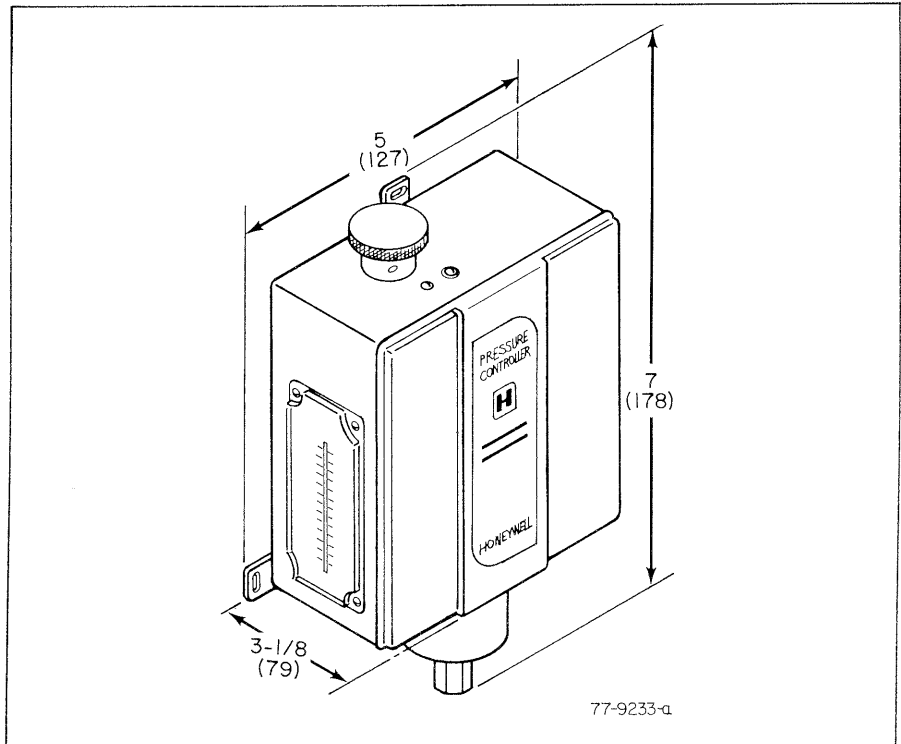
PP97A APPROXIMATE DIMENSIONS IN INCHES (MILLIMETERS)
